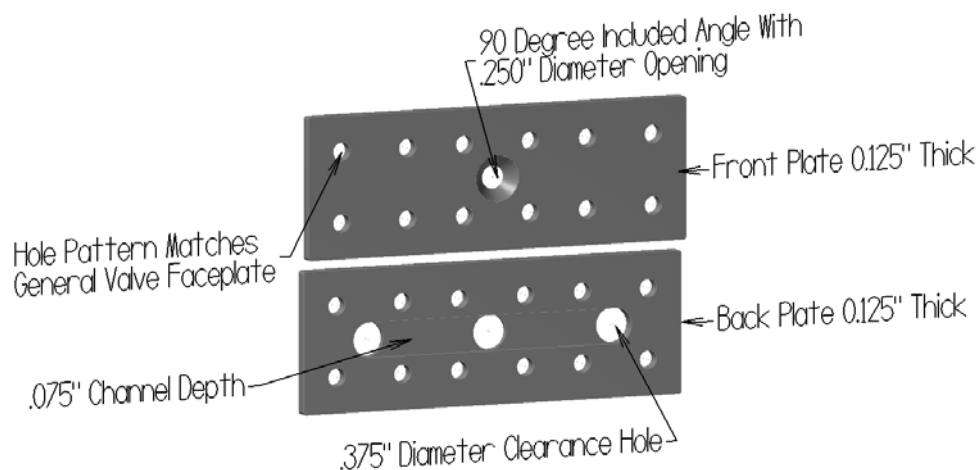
Drawing of the entrainment-block assembly. The front and back plates are held together with three General Valves by using a nut and bolt for each of the clearance holes. The top drawing is the front of the entrainment block. Only a hole is cut out for the central valve, which produces the main expansion. The bottom drawing is the back of the entrainment block. The three faceplates attach to the reverse side that is shown. The side of the entrainment block that is shown has a groove cutout for the gases introduced by the two end valves; therefore, the gases produced from the two side valves are entrained into the main expansion.
